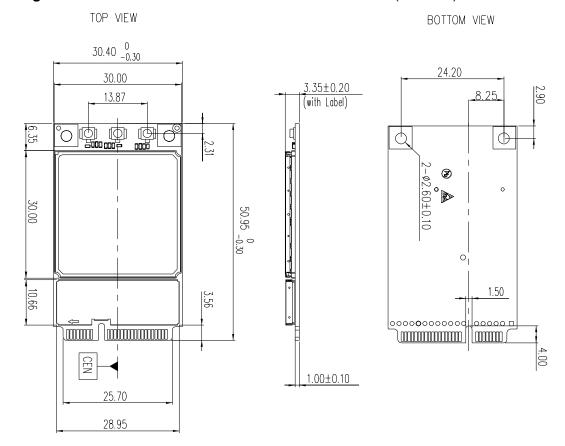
Dimensions of the ME909u-521 Mini PCle module (Unit: mm)
